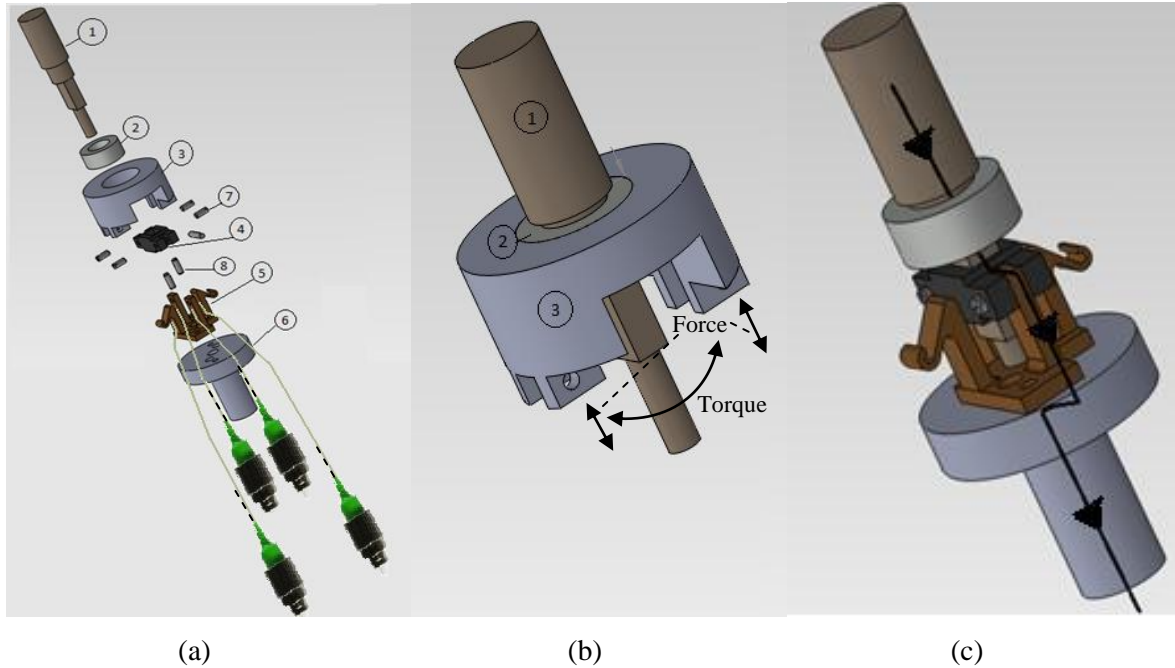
Modified sensor with axial FBG installation configuration: (a) exploded view, (b) ball bearing (part 2) connects part 1 to part 3 with minimum friction thus making force and torque measurements decoupled, and (c) the solid line shows how the torque flows from part 1 to part 6. (1- square cross section shaft for torque transmitting; 2- ball bearing; 3- part for transmitting axial force; 4- part for transmitting axial torque; 5- active element for axial force and torque; 6- base and shaft).
